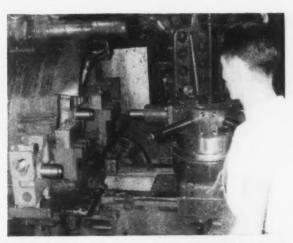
Several boring and turning operations are performed on pearlitic malleable iron housings by carbide tools in this Potter & Johnston turnet lathe.
